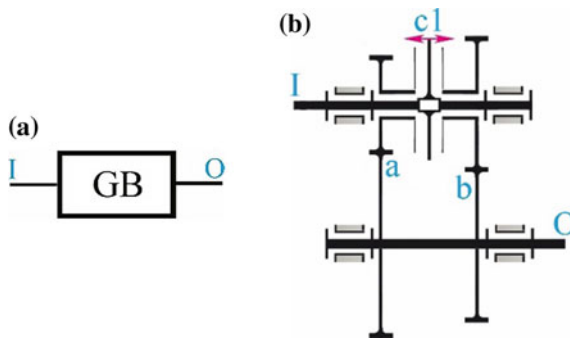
Generalized symbol (a) and kinematic diagram (b) of a two-speed gearbox with fixed axes of gears. I, O—the input and output links, respectively; c1—shifting element (clutch or synchronizer) which has three working positions
